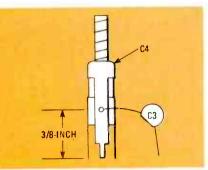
CAPACITOR C3 should be soldered to leg of trimmer C4 before it is mounted on board. Capacitors C5/C6, C8/C9, and C10/C11 should be prepared the same way.
